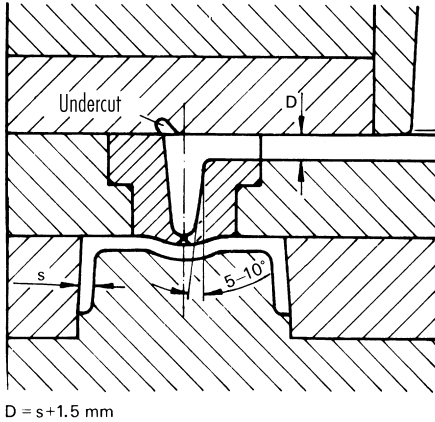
Pinpoint gate in three-plate mold [6.5]
